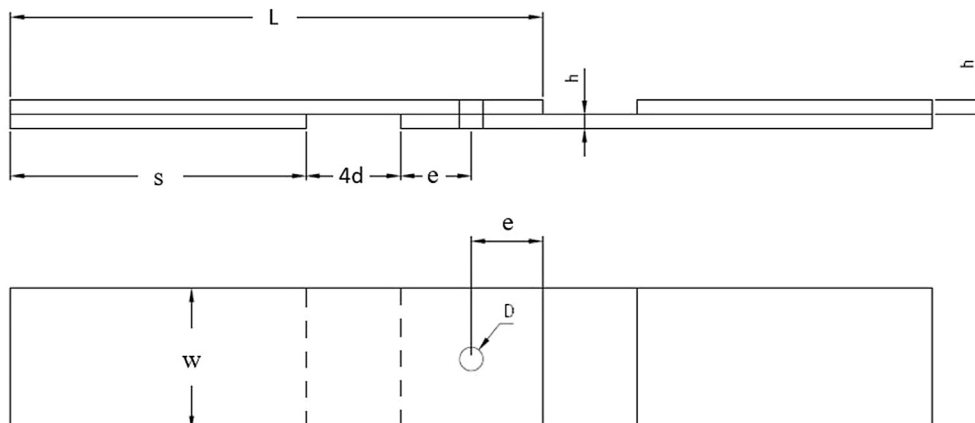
Single shear, two-piece single-fastener test specimen drawing [41].
